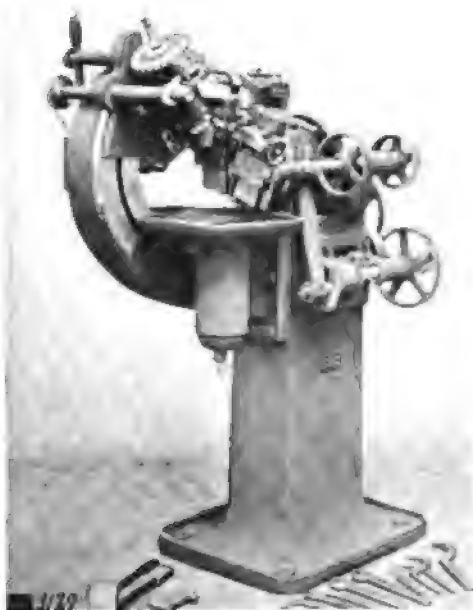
WARREN MACHINE. (Ludwig Loewe & Co.)
